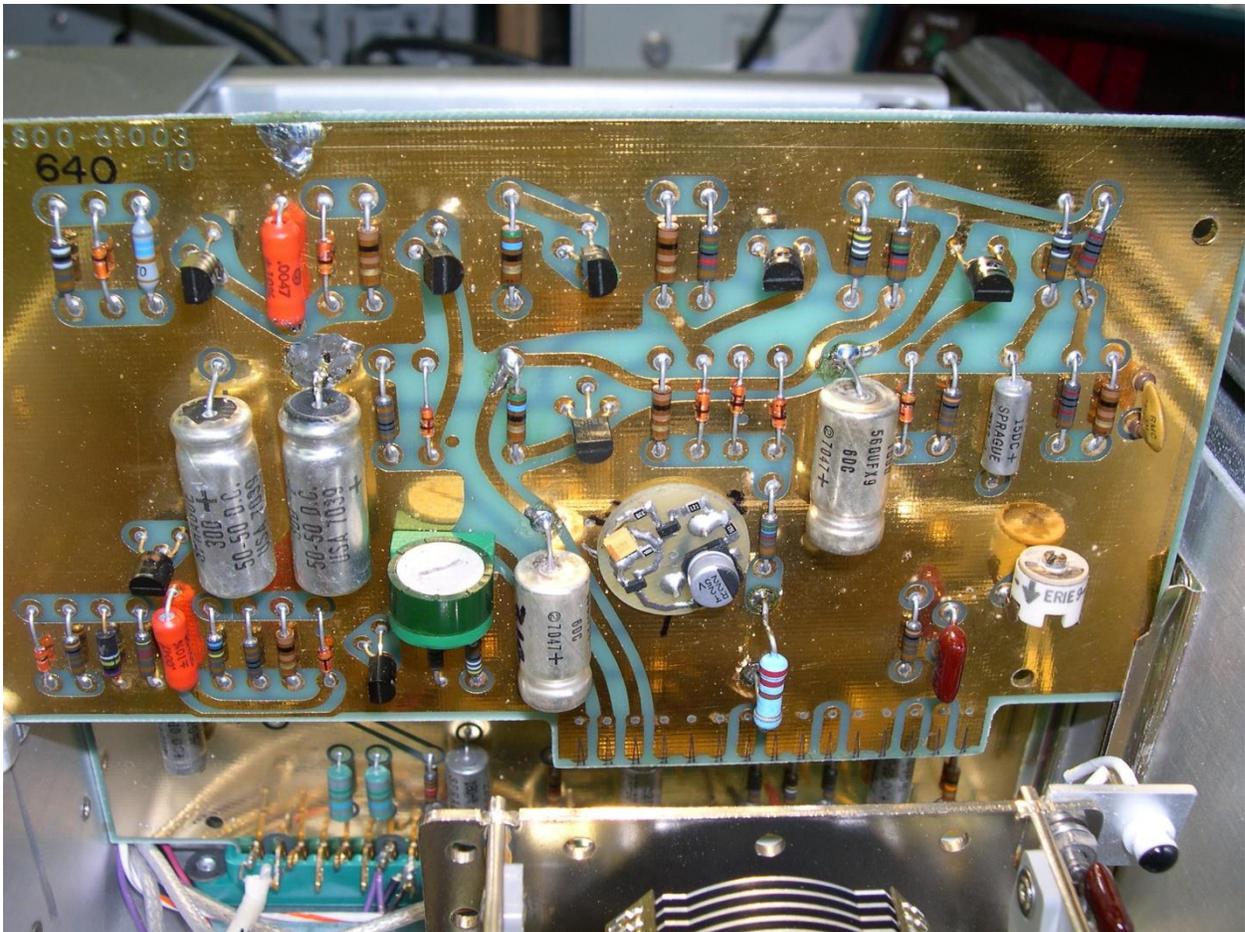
BEBE5080-1718A installed in the HP4800A circuit board.
